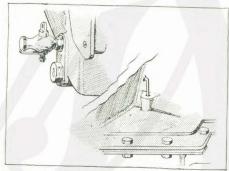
Oil Level Indicators on the 11 H.P. "Standard" Engine.
